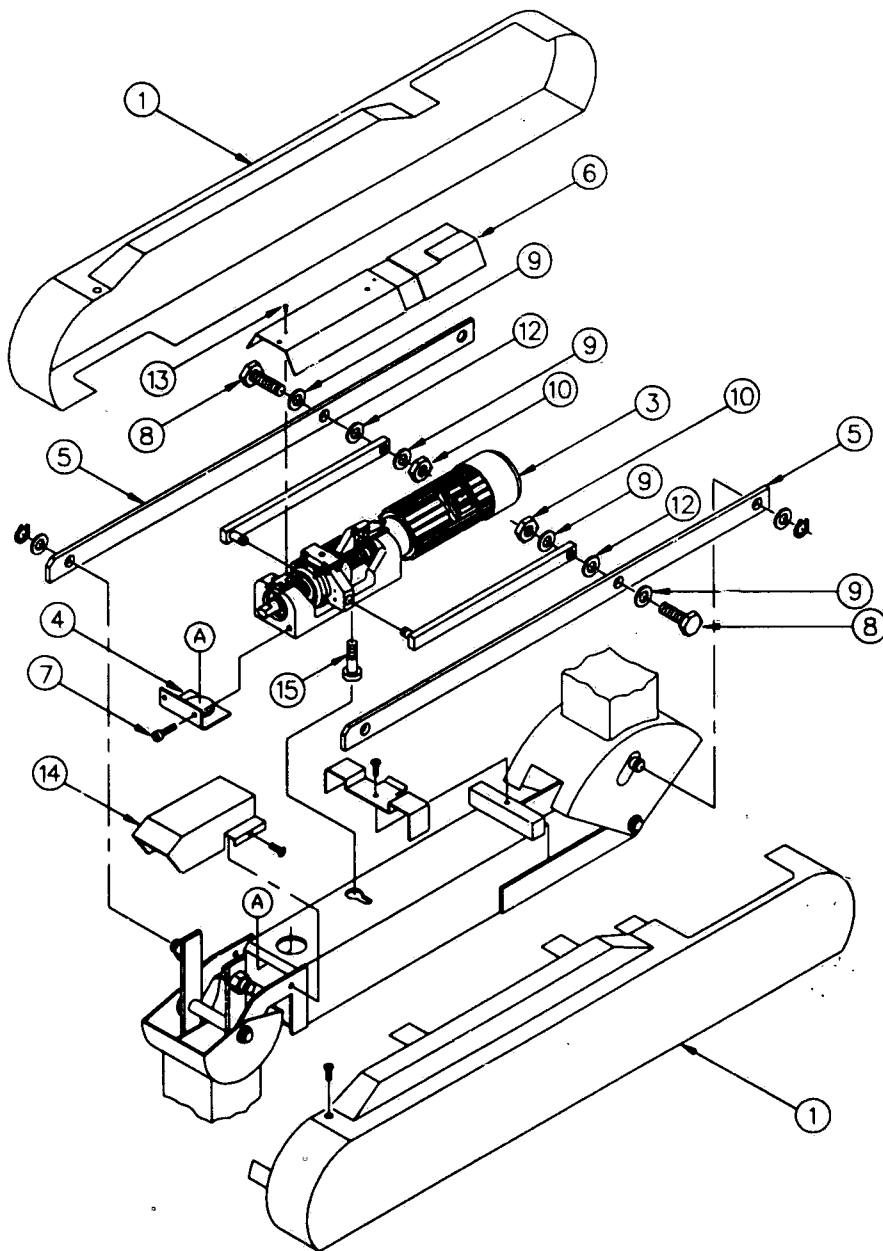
Motorized Arm Assembly — All Motorized Models
